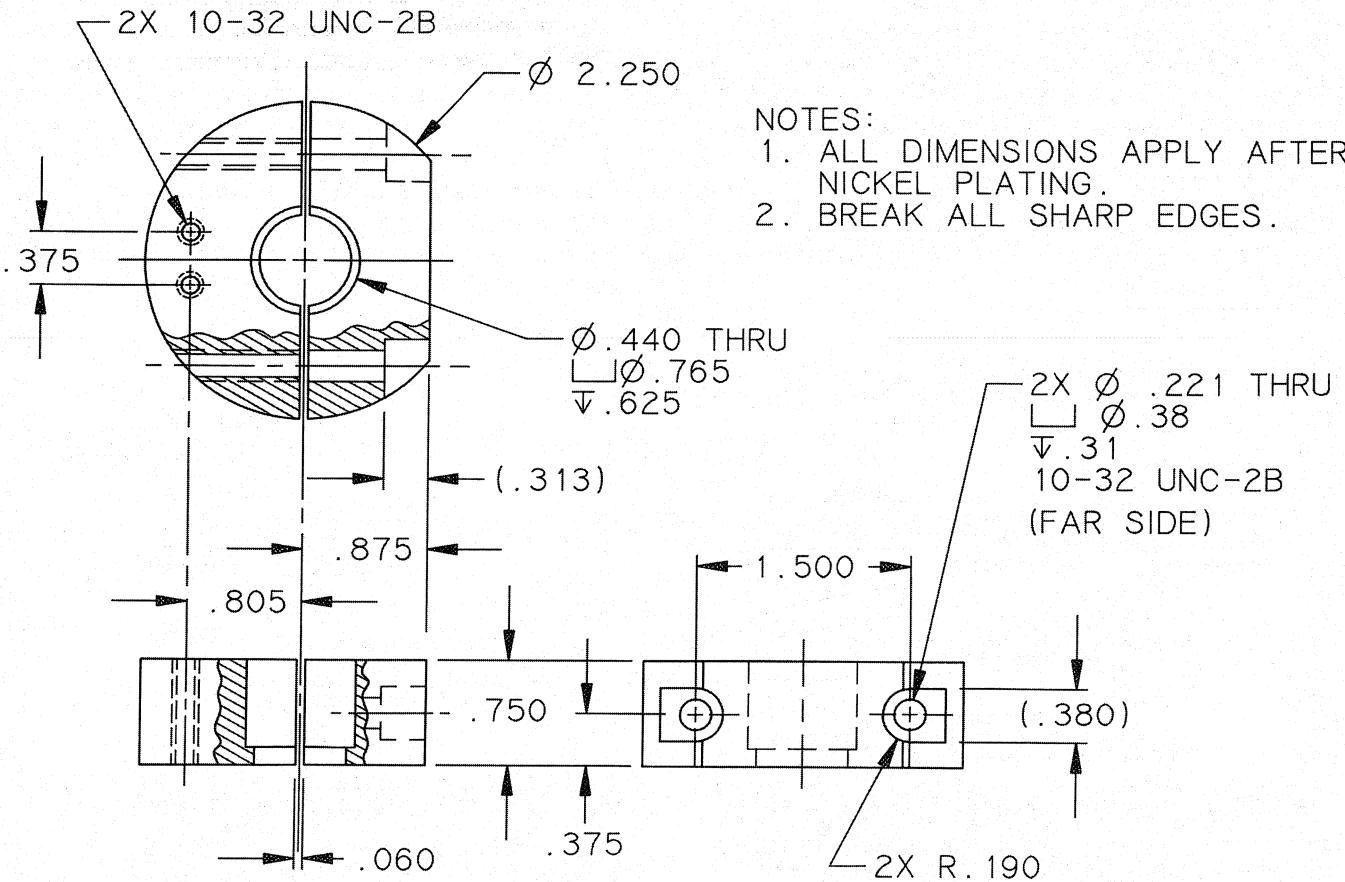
An Engineering Drawing with CAD Lettering
